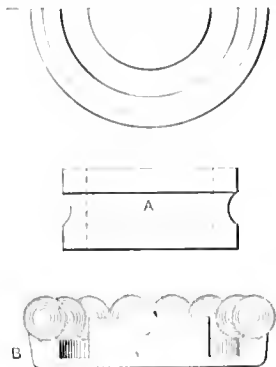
Inner Race and Section through One-half the Cup used in Assembling the R. B. F. Radial Bearing
